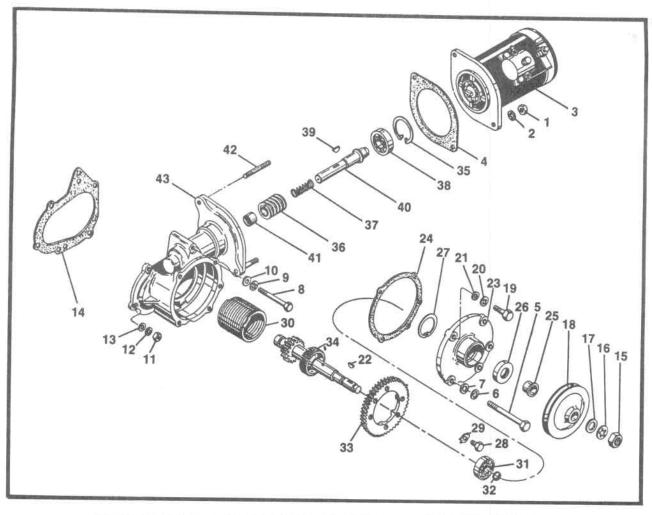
EXPLODED VIEW OF STARTER AND DRIVE ADAPTER.
